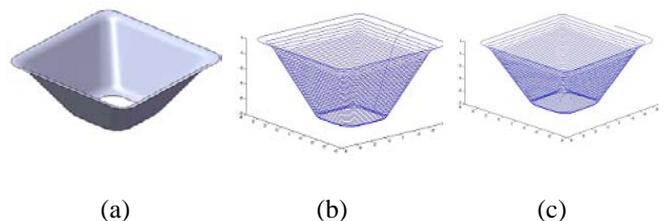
(a) CAD Model (b) Contour Tool path (c) Helical Tool path
